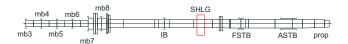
180,000 DWT bulk carrier shaft system arrangement drawing with SG installed
